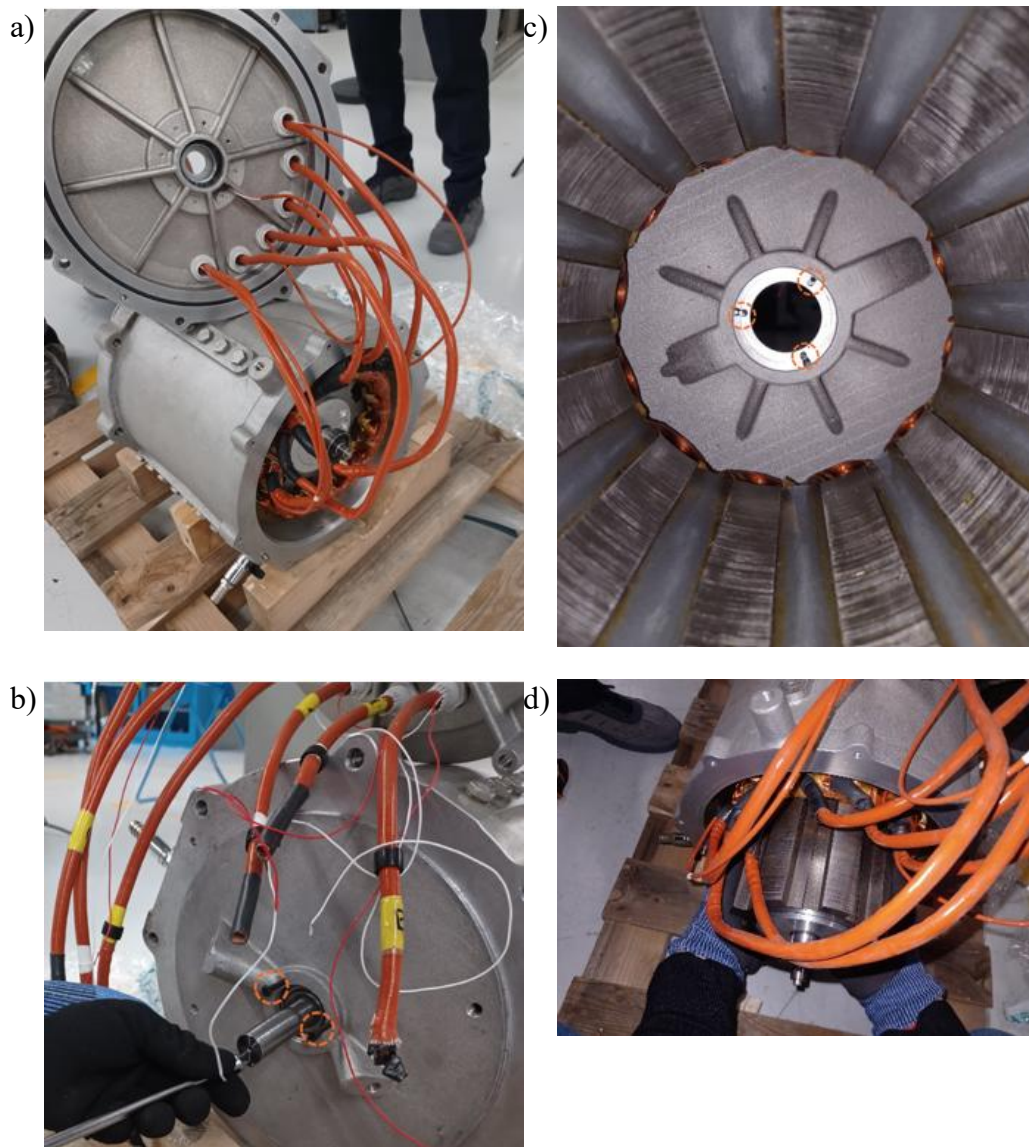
Rotor assembly teardown steps: a) unscrewing of the rear cover, b) and c) external and inner view of the housing and stator with the three screws used to push away the rotor assembly d) extraction of the components on rear side
